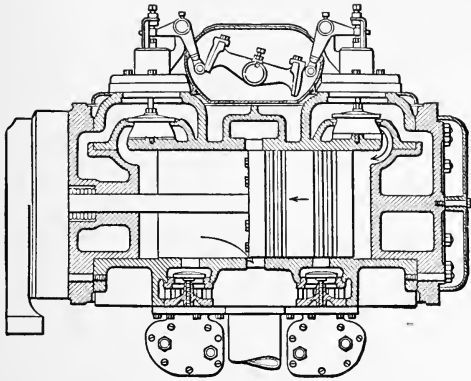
Section through Cylinder of a Skinner "Universal" Uniflow Engine.
